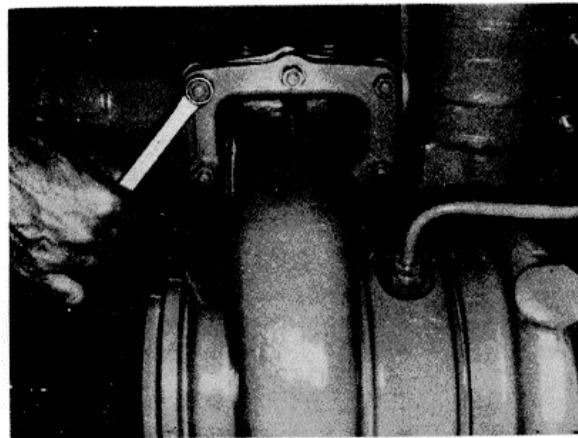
, (N11953) Tightening turbocharger mounting nuts
